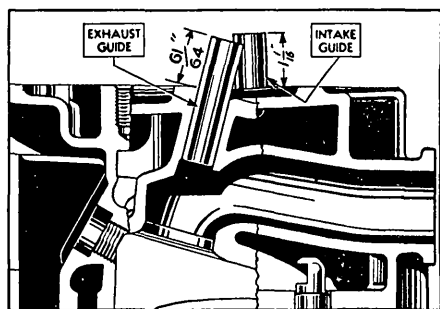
Install valve guides as shown. 1937-52 standard engine
